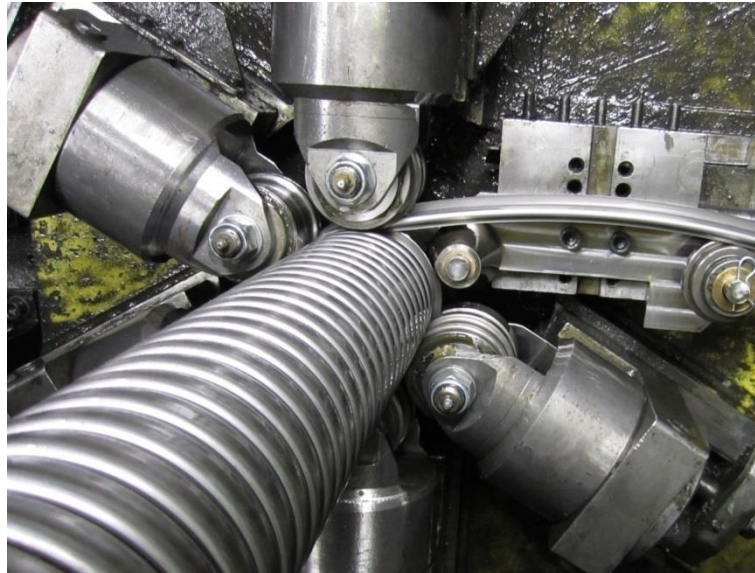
Front-view of helical winding on a loop type carcass machine
